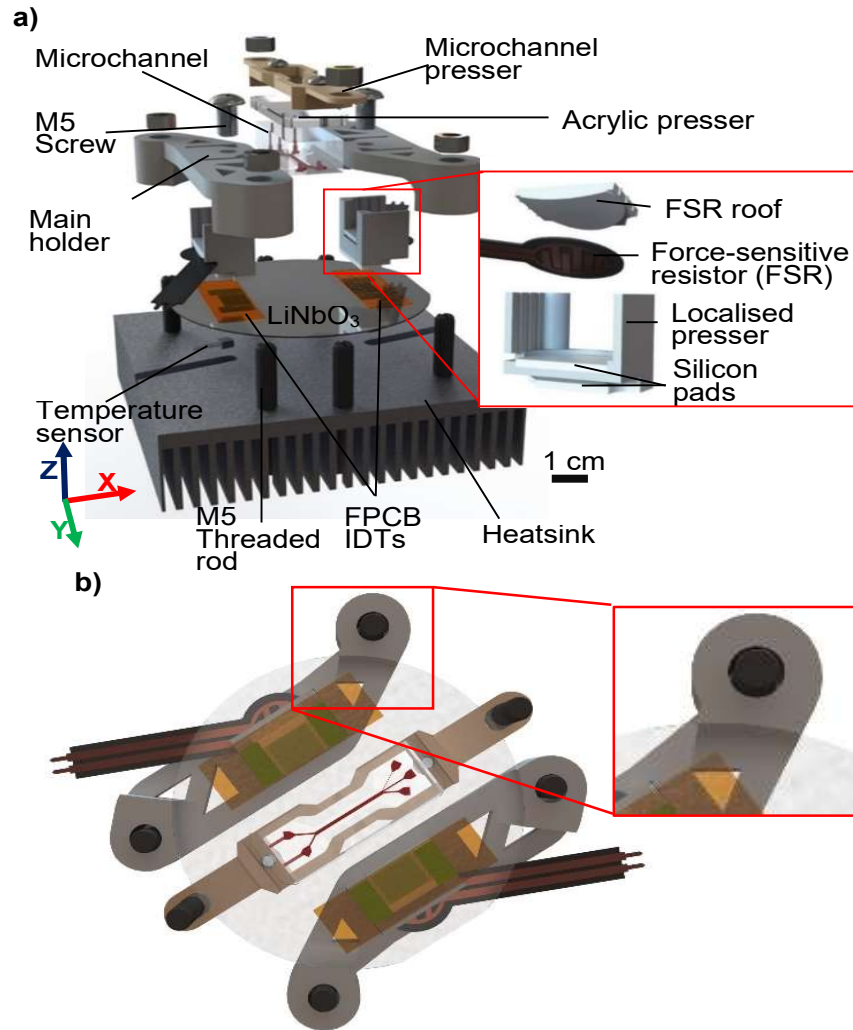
a) 3D exploded view of the VAD with an inset presenting the assembly and components of the localised pressers. b) Bottom view of the main holder edges' matching the LiNbO_3 circumference.
